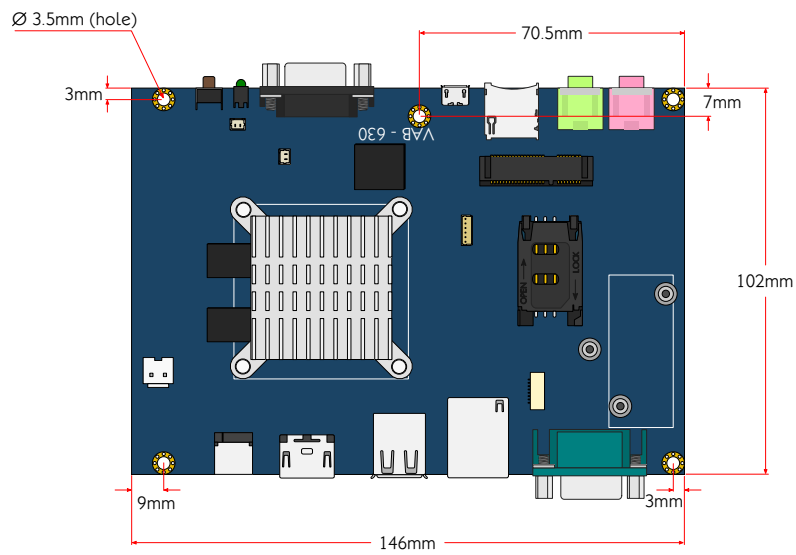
Mounting holes and dimensions of the VAB-630 (top view)
